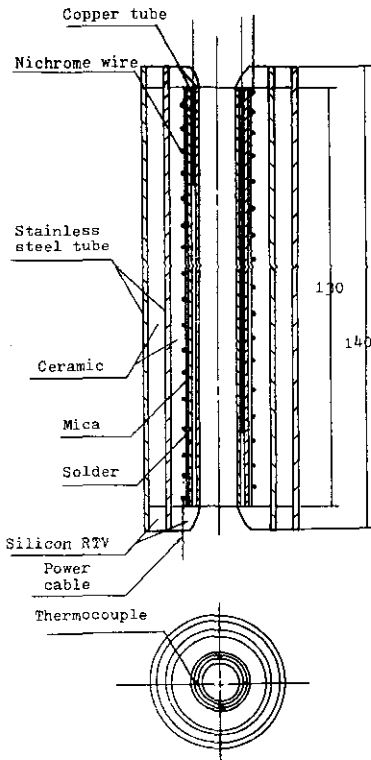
Heater design for the convective boiling experiments in vertical tube
